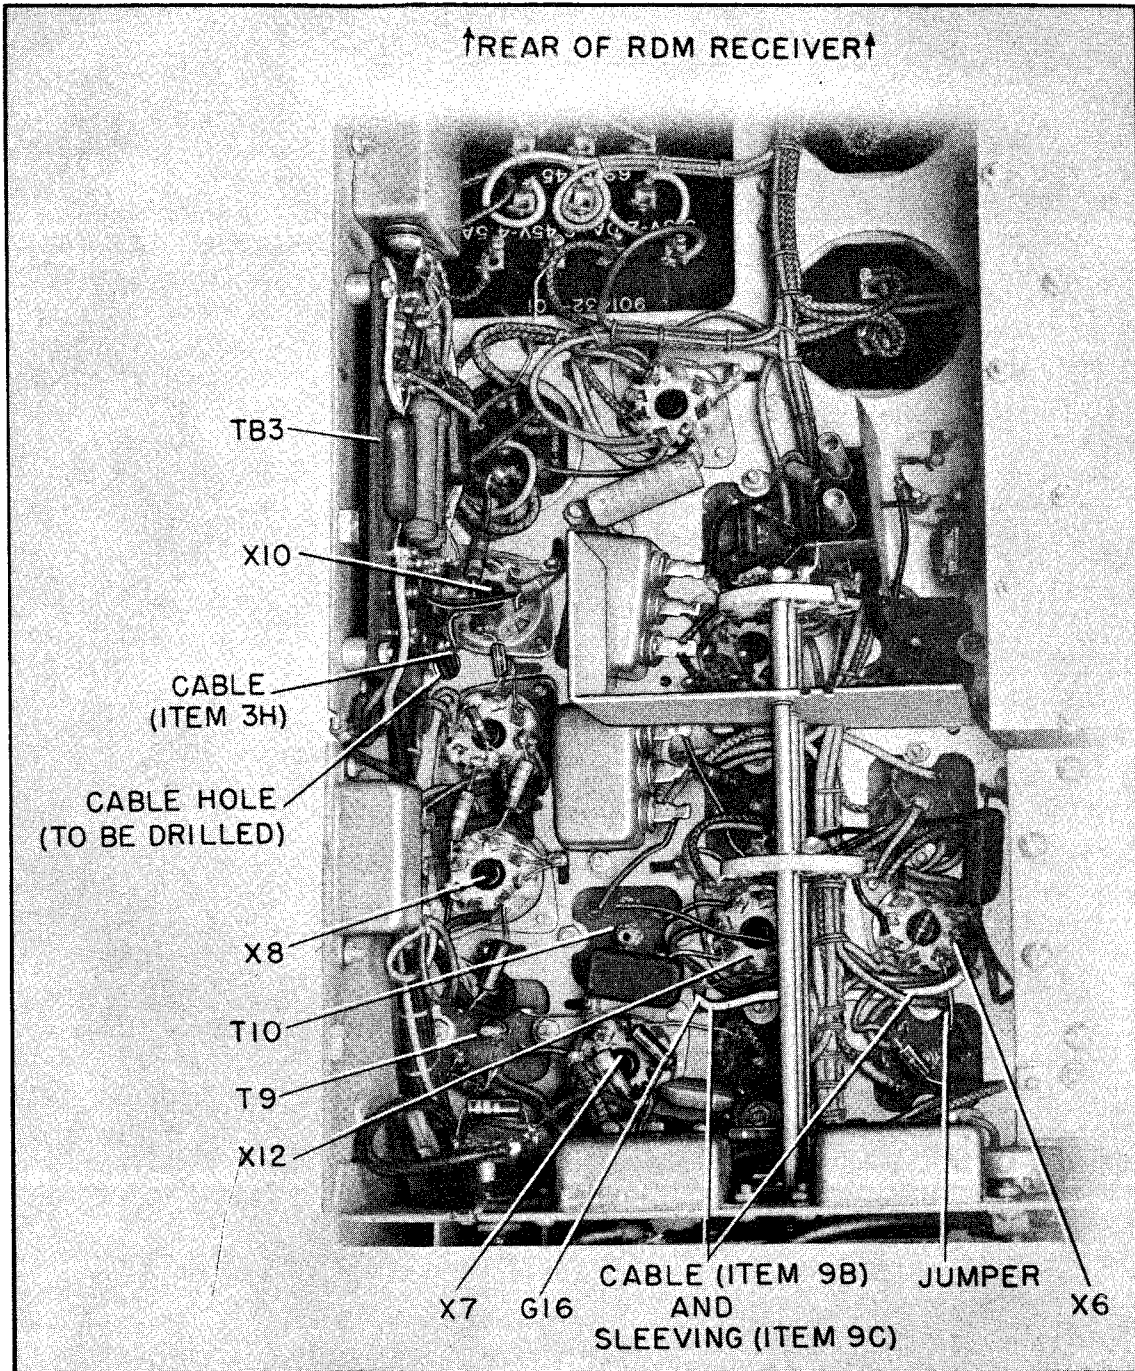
Receiver Coupling Kit Installation on RDM Receiver, Bottom View
